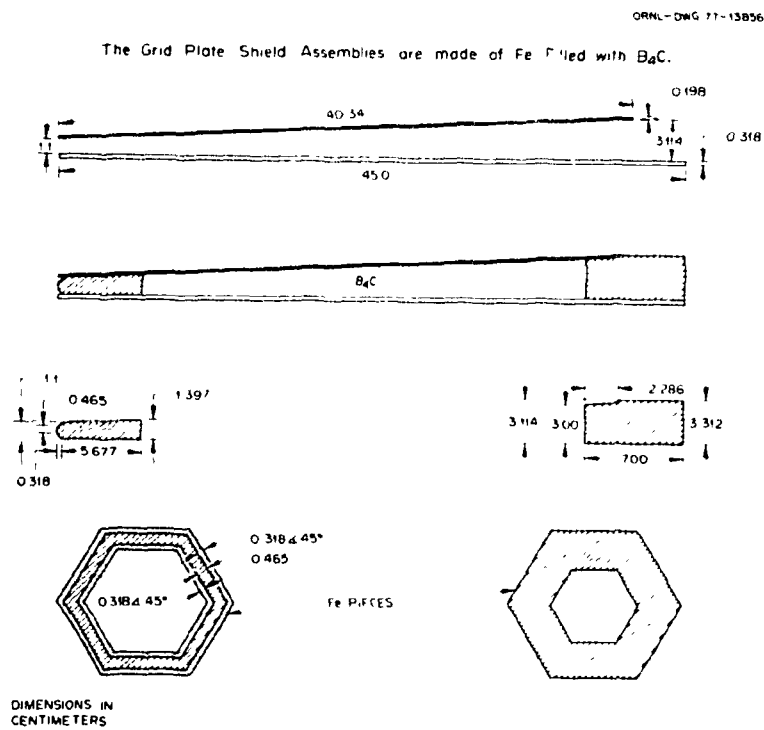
Schematic of grid plate shield (B_4C) subassembly.
